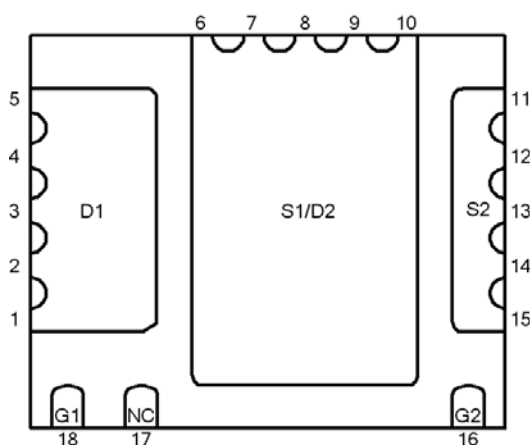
Dual 5x6 PQFN Bottom Contact Pads
